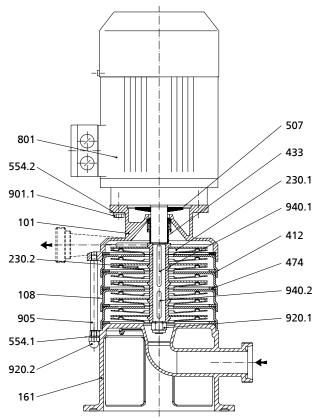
General assembly drawing, Vitastage 05/1 - 05/8
